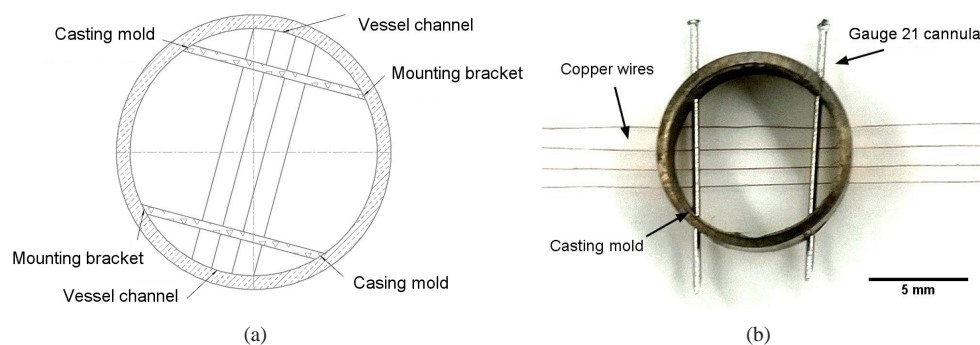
(a) Schematic of the cylinder casting mold design for regulating 4 rows of vessel channels in the tissue phantom and (b) image of a finished casting mold with 4 rows of copper wires and 21 gauge cannulas inserted through the drilling holes
